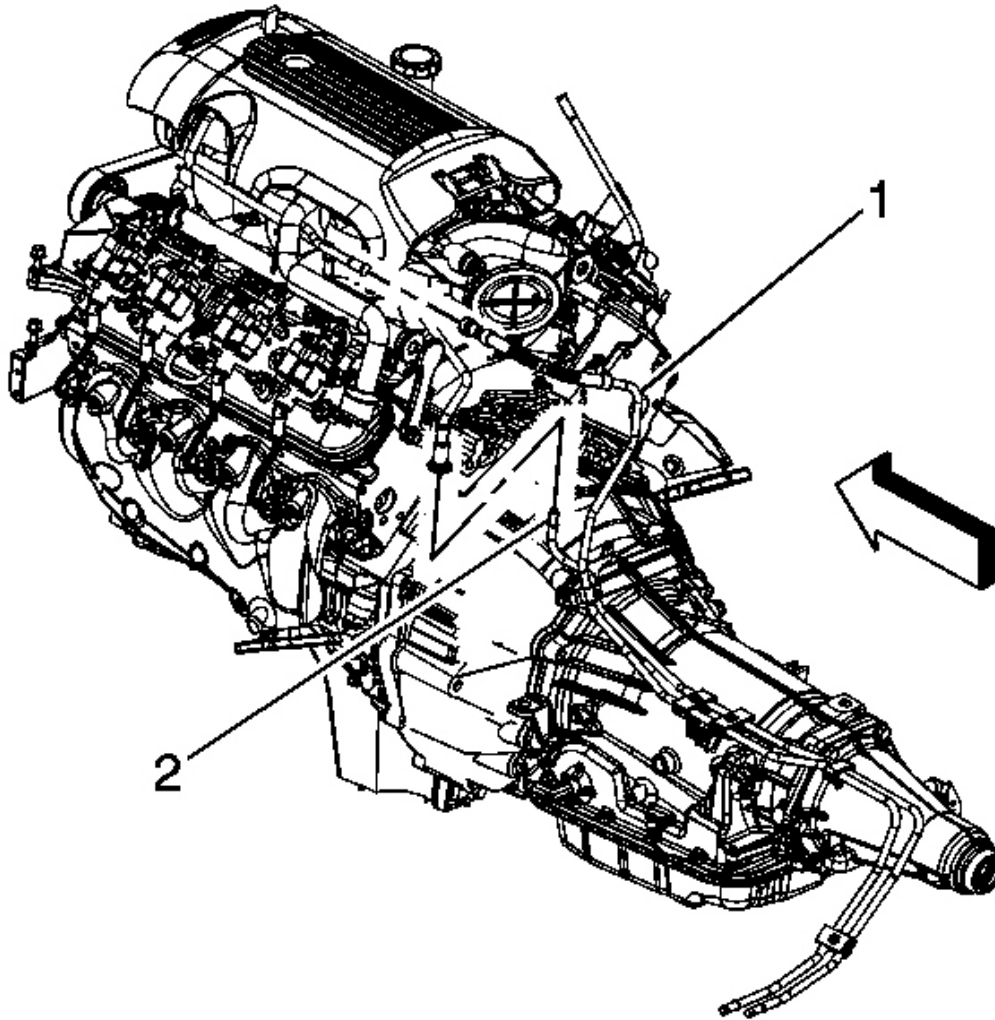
Identifying Fuel Feed & EVAP Pipes
